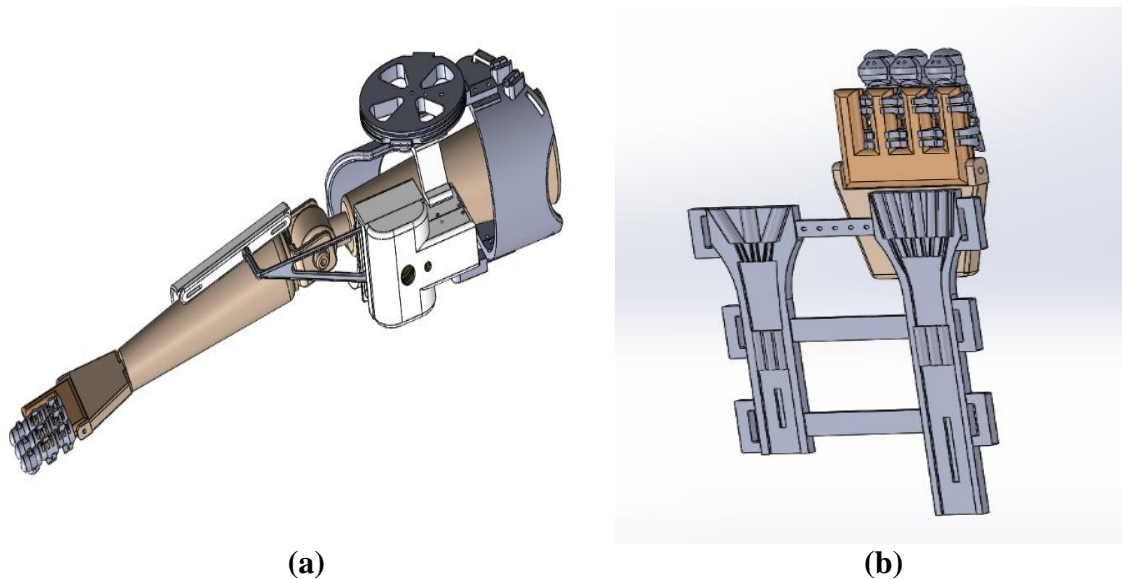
CAD model of the shoulder and elbow mechanism (a); Hand mechanism design (b)
